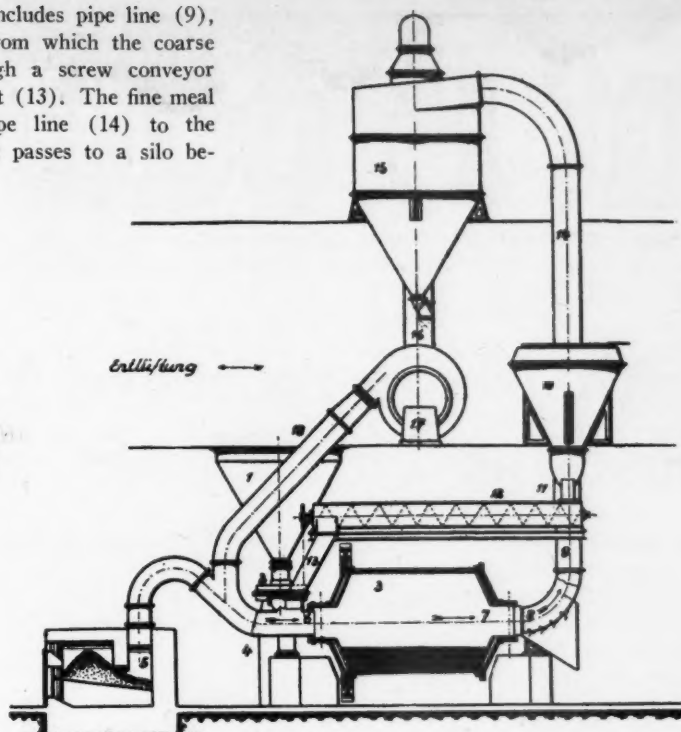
Section of the Humboldt plant for drying and crushing gypsum
